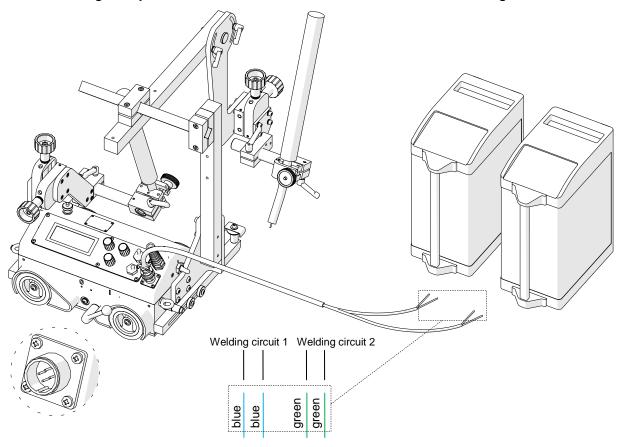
Connecting the arc ignition cable to welding circuits
